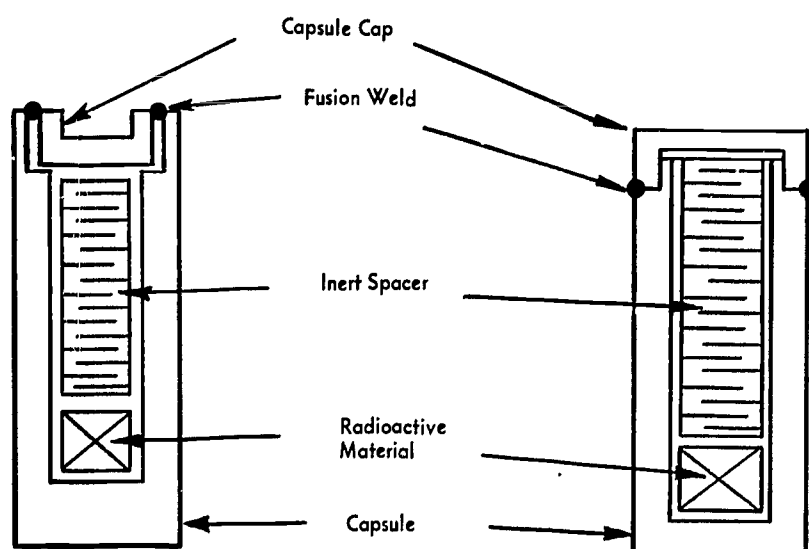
Fusion Welded Capsule Designs.
